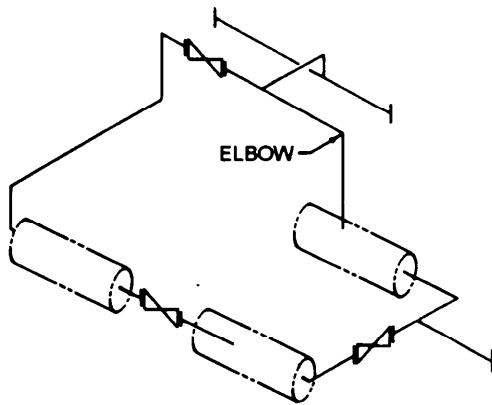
Single-line pictorial piping drawing of figure 5-1.
